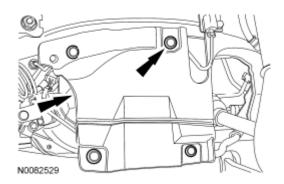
Locating LH Splash Shield And Pin-Type Retainers
